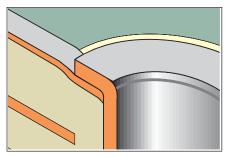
The eyelet flange can be used to secure a new conductor in place.
